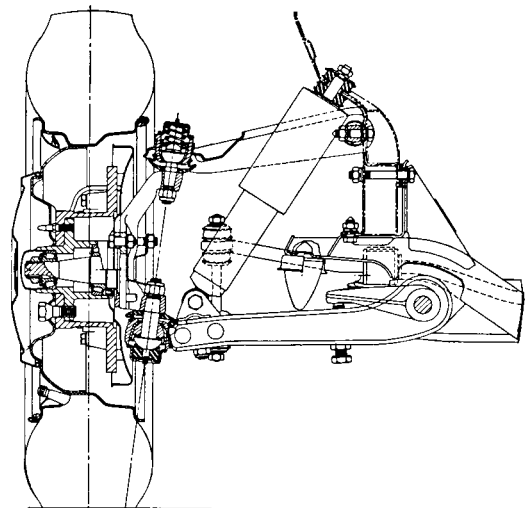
Front-wheel suspension for rear-wheel-drive car.
